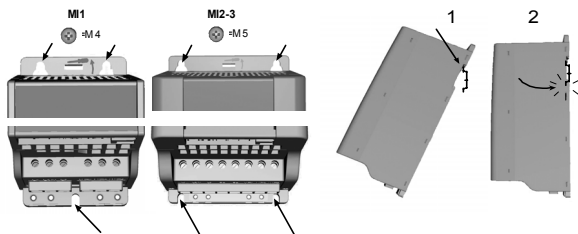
Screw mounting (left) and DIN-rail mounting (right)
